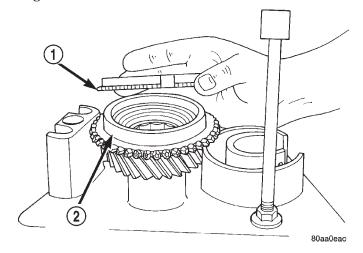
Installing Fourth Gear Synchro Ring On Input Shaft
